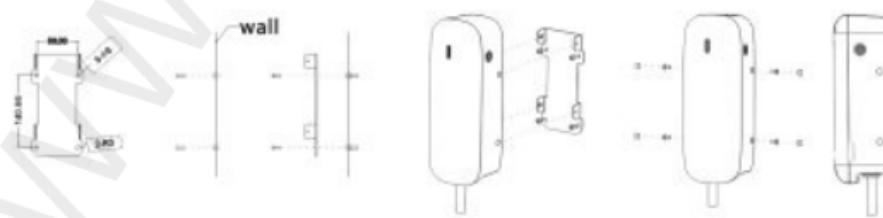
Wall-mounted installation procedures of Mode C charging station
